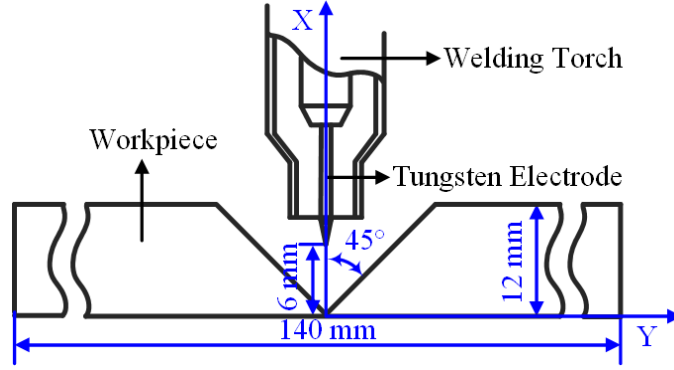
Geometrical Cross Profile of Welded Workpiece.
